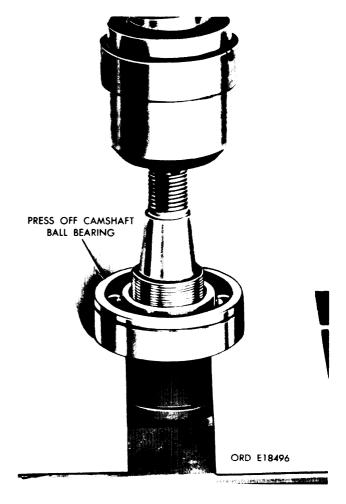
Pressing camshaft ball bearing from camshaft.
